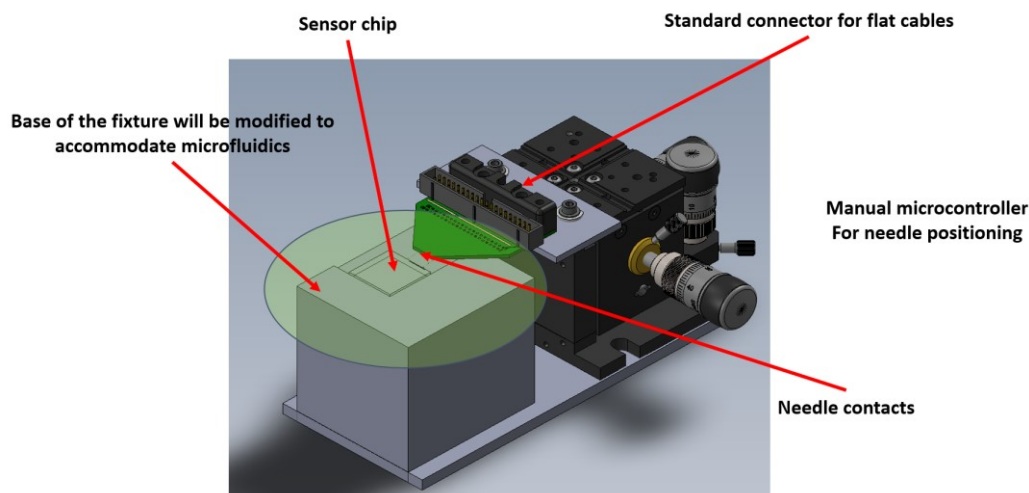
Design of assembly of the PCB with the sensor photonic chip.
